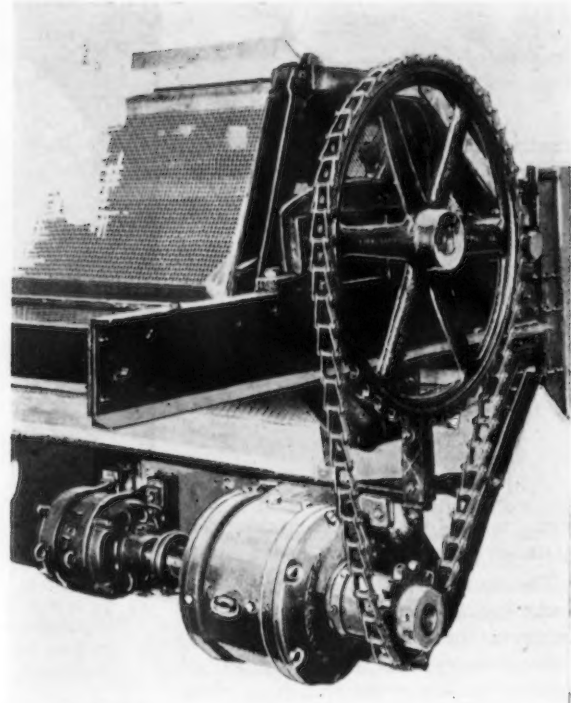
A difficult location for a reducing unit drive mounting, in which a chain belt helped to solve the problem.
